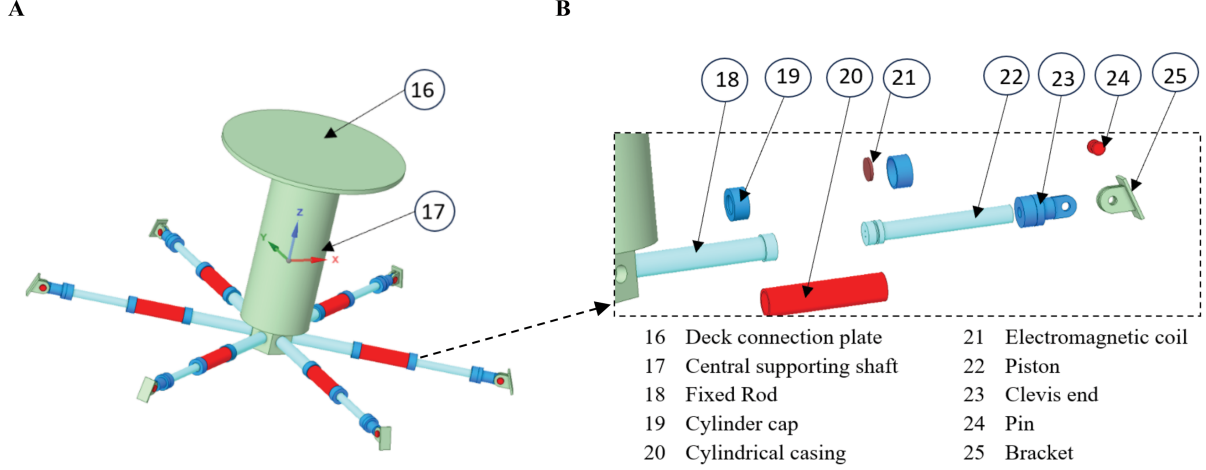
Magneto-rheological damper assembly. (A) Working mechanism. (B) Exploded view
